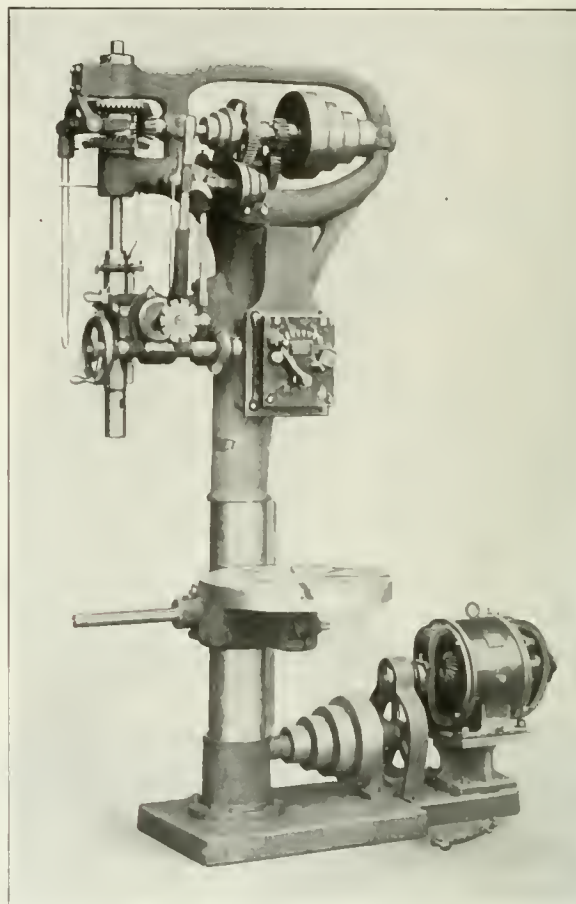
Motor Starter and Board for Switch Mounted on a Drill Press
